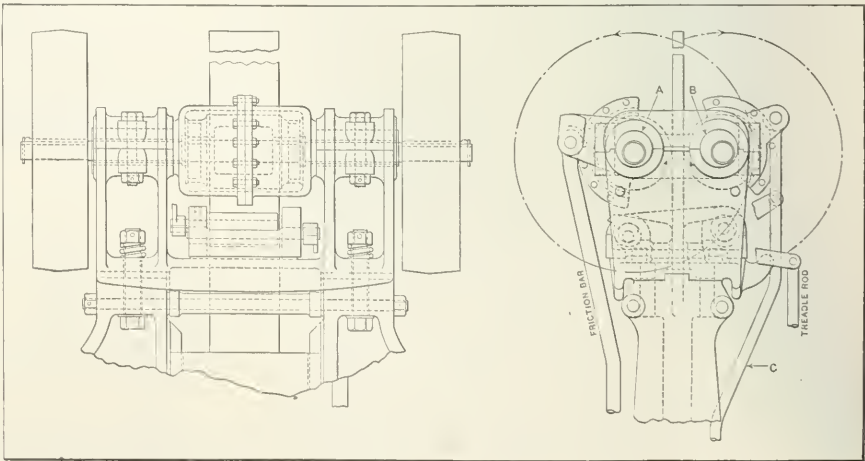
Lifting Head having Eccentric Adjustment for Front and Rear Friction Rolls and Board Clamps
